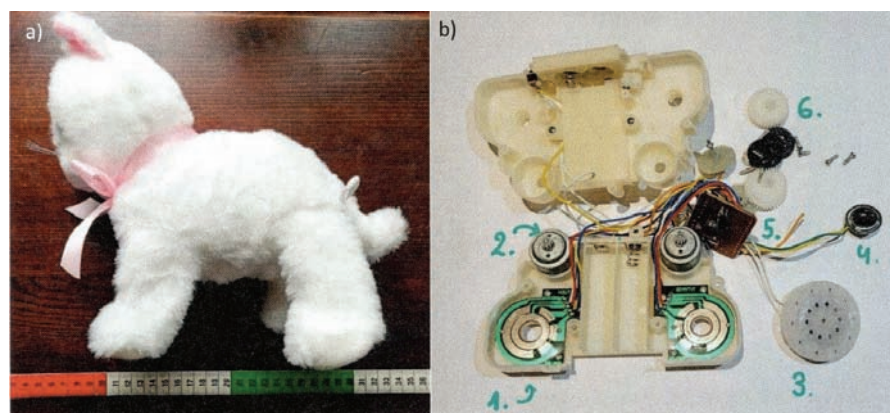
Interactive robo-toy for children, *Interaktivni kotatko*: a) view of the toy, b) mechanism after disassembly into its components: 1 – drive position sensors, 2 – two electric drive motors, 3 – loudspeaker, 4 – touch sensor, 5 – controller board, 6 – transmission (Fenghua Fun Toys)
